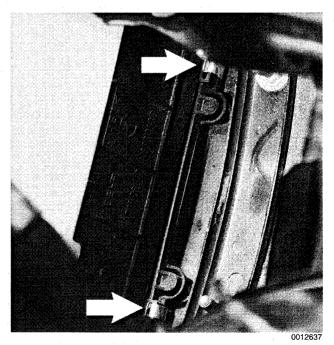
Spring clips (arrows) on driver side of blower housing.
